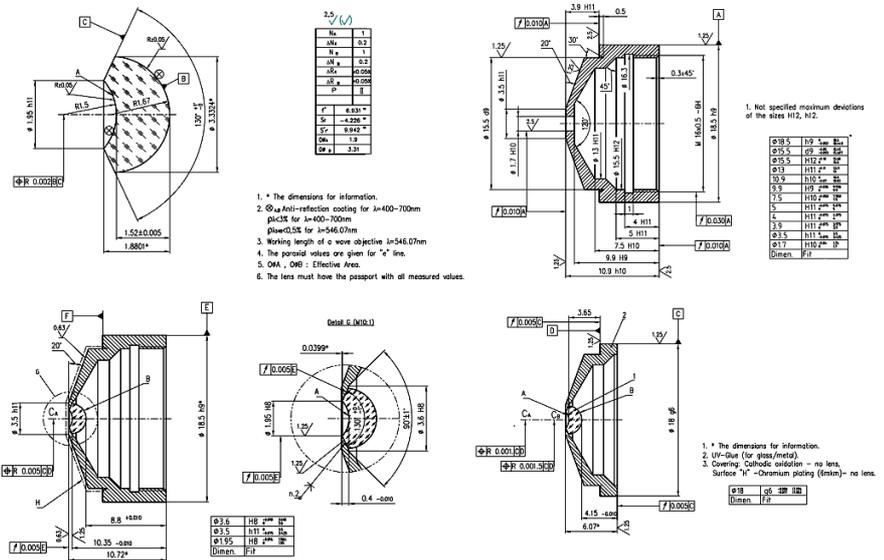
Typical drawings for the frontal lenses (in air) mounting design.
